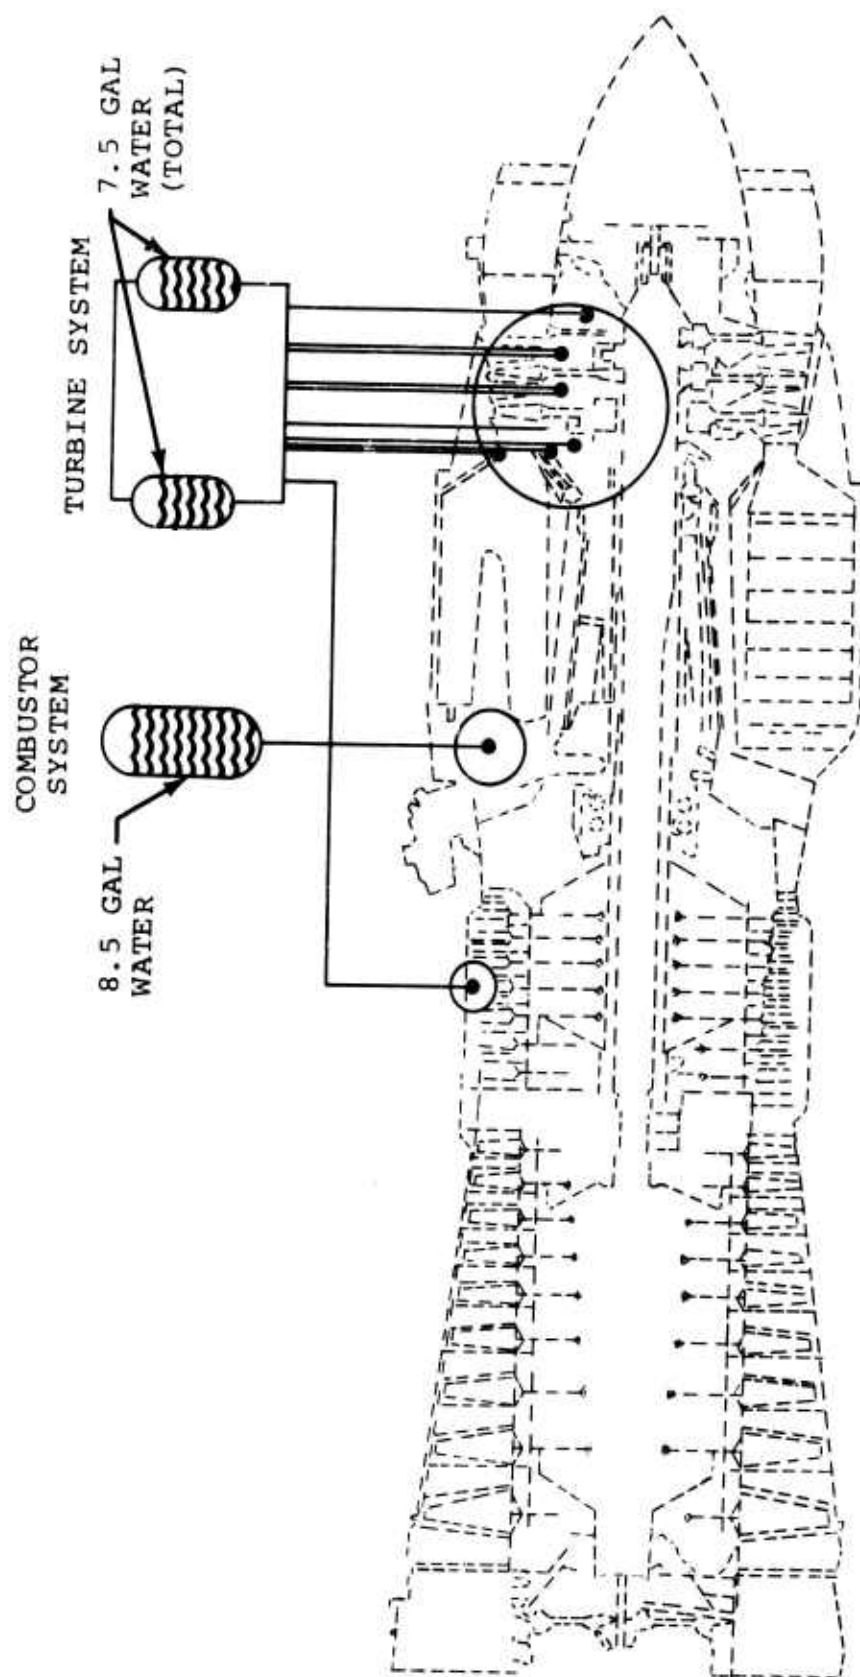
Crash Fire Protection System for J57 Turbojet Engine.
